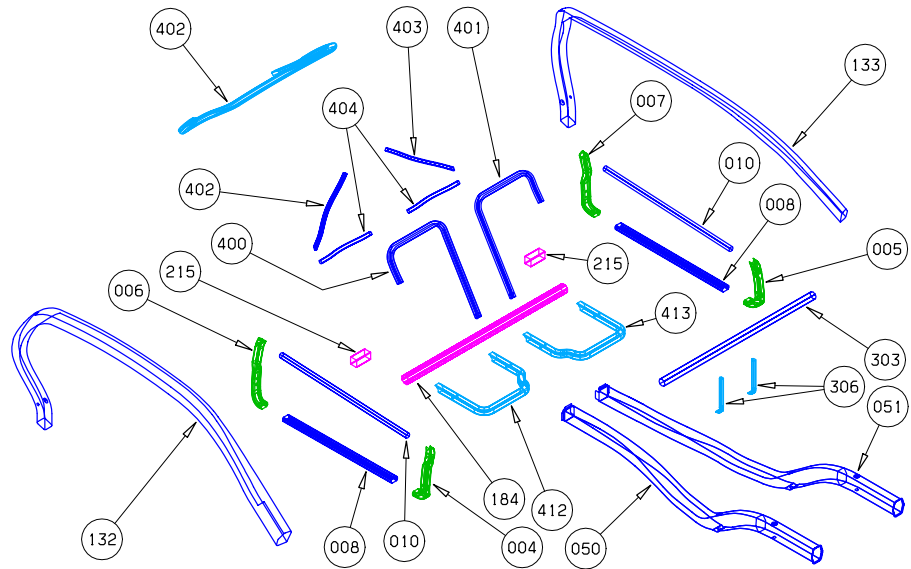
Exploded view C-Class tubes (chassis parts not shown)
